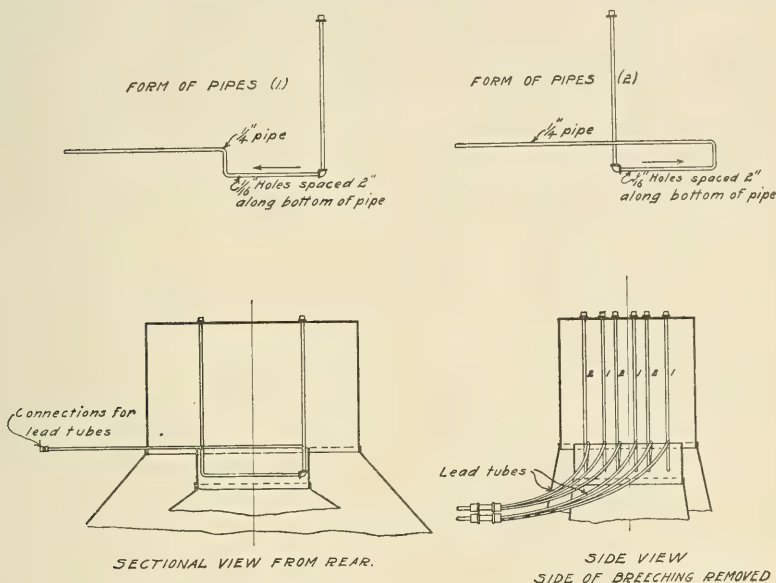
IMPROVED FORM OF GAS SAMPLING TUBES
